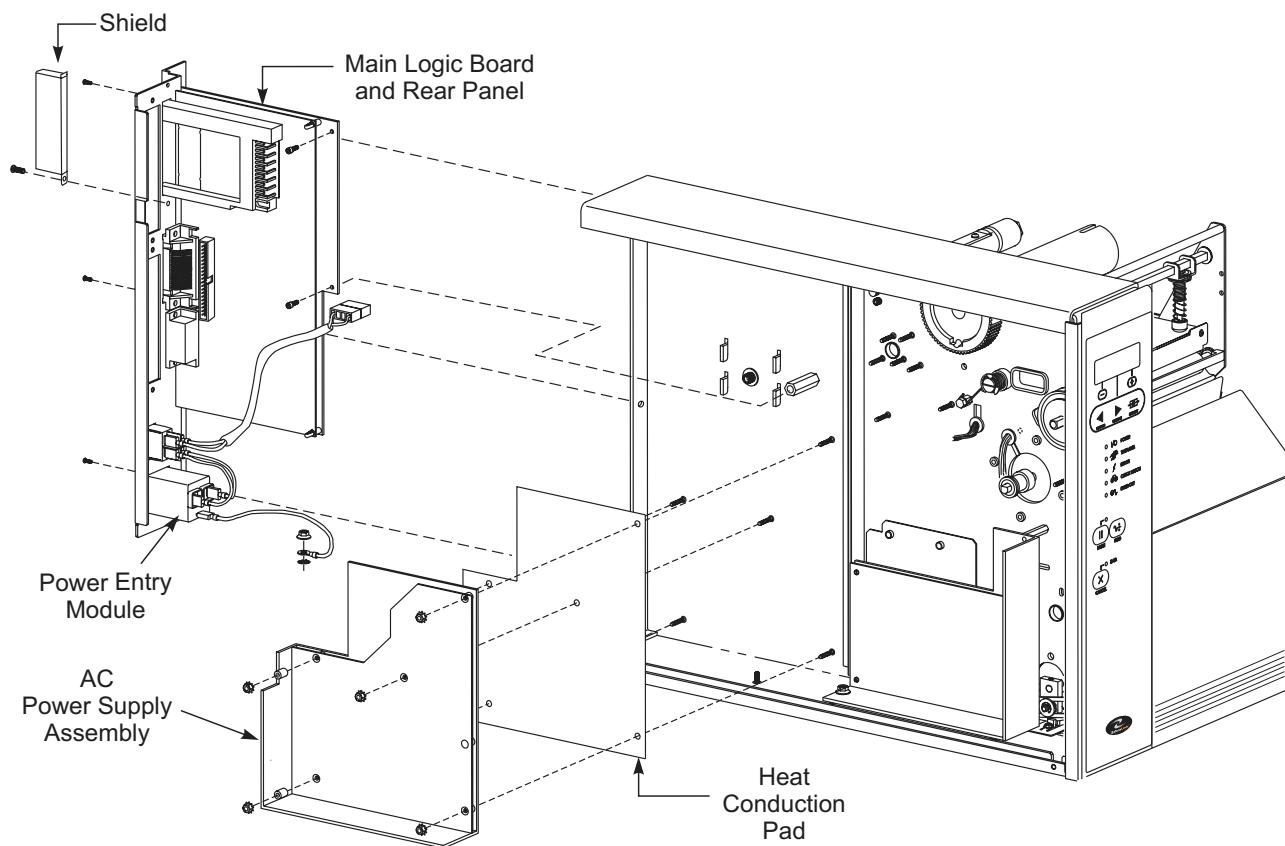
AC Power Supply and Main Logic Board Removal/Installation
